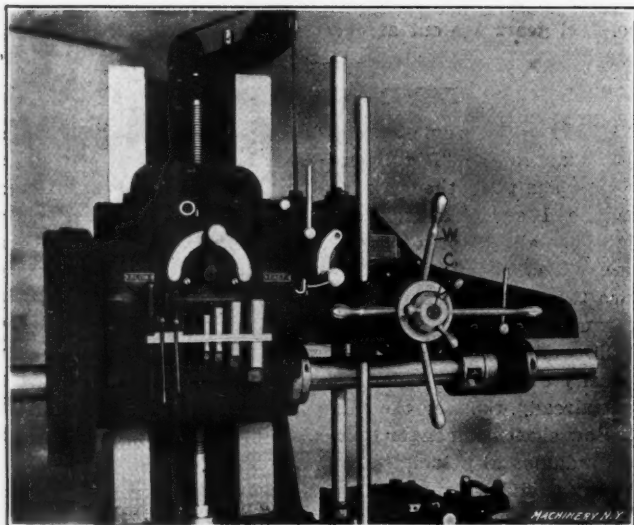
Detail View of Spindle Head, showing Operating Handles
